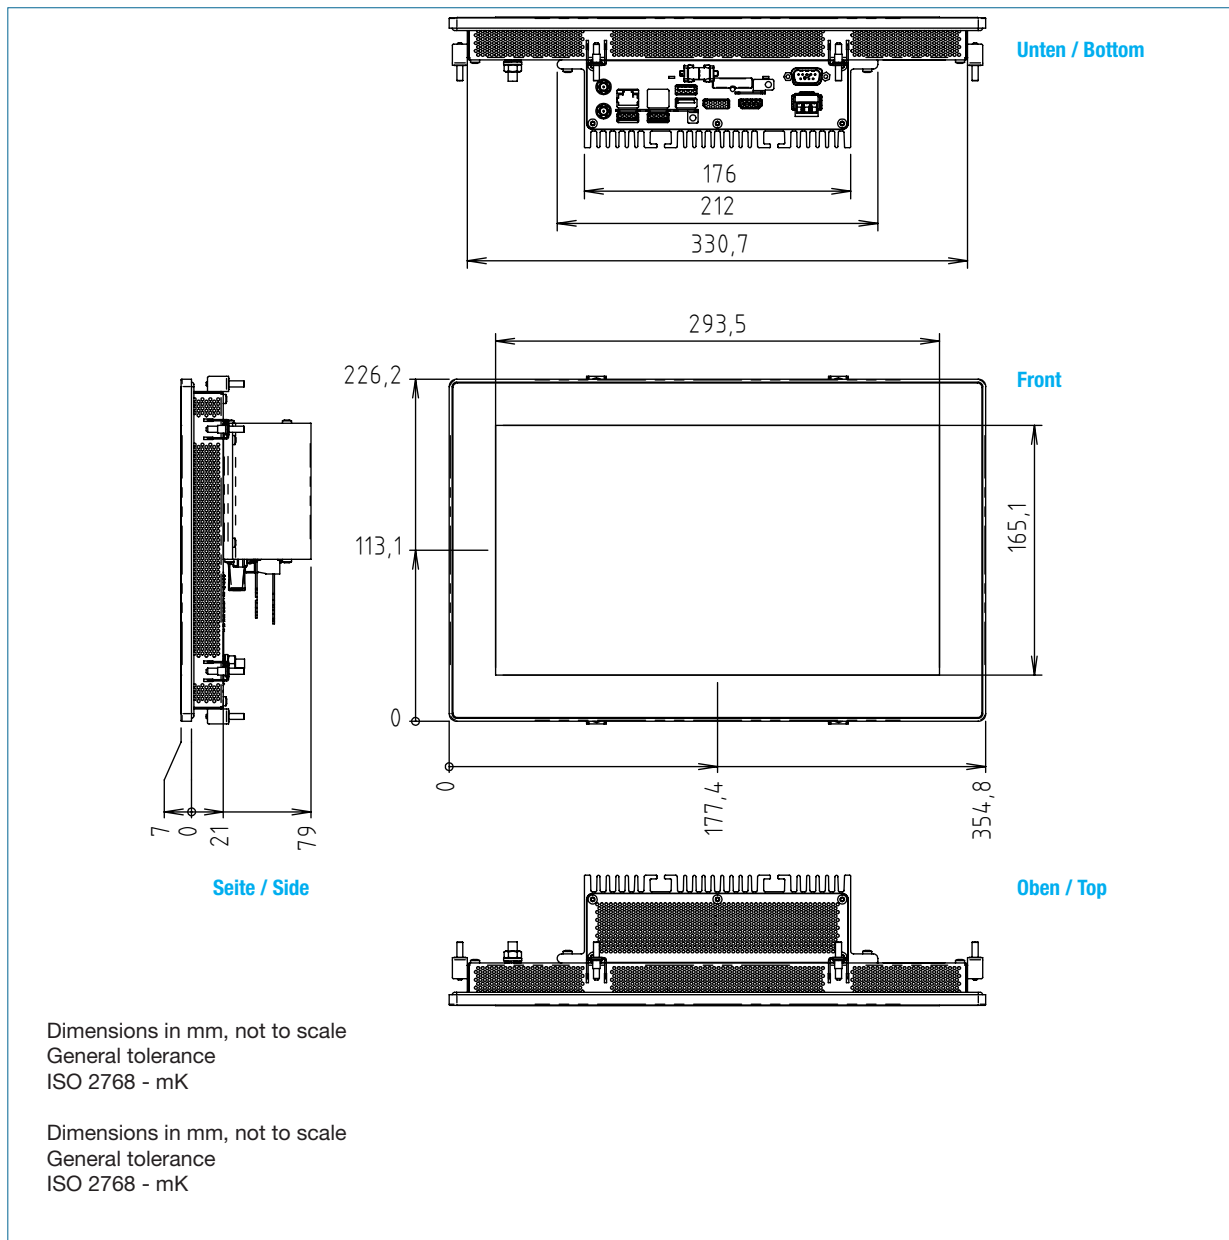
13.3" Prime Panel Pico Installation - device dimensions
